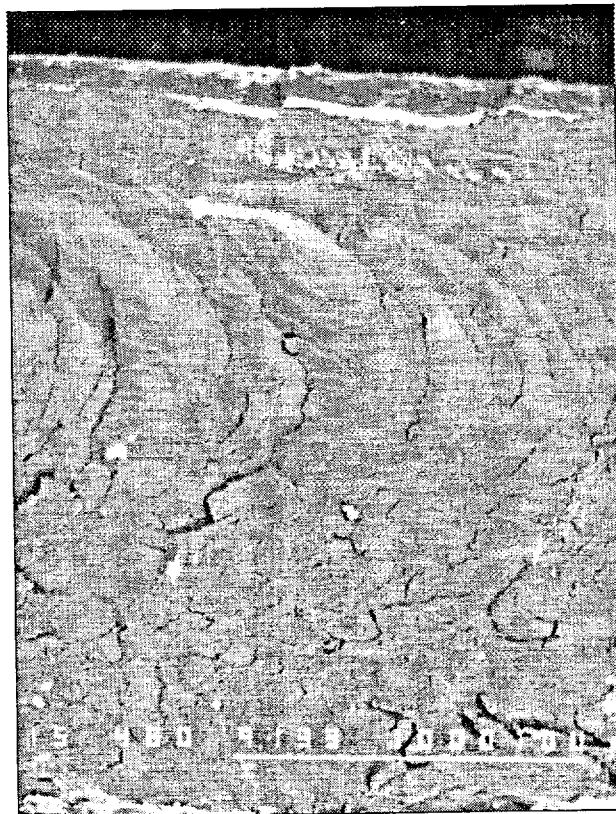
48X image of fracture surface using backscattered electrons
